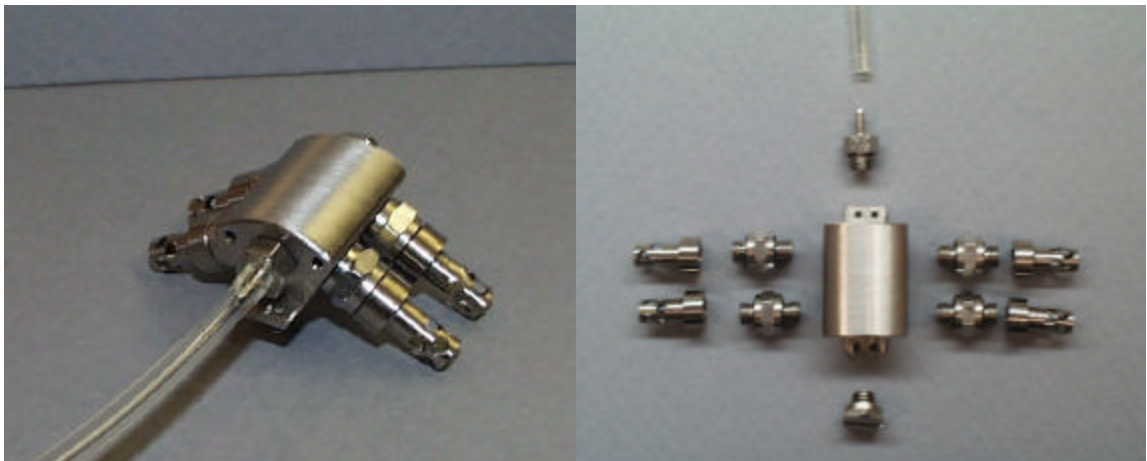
Assembly of Prototype Manifold and Chambers with Necessary Hardware
